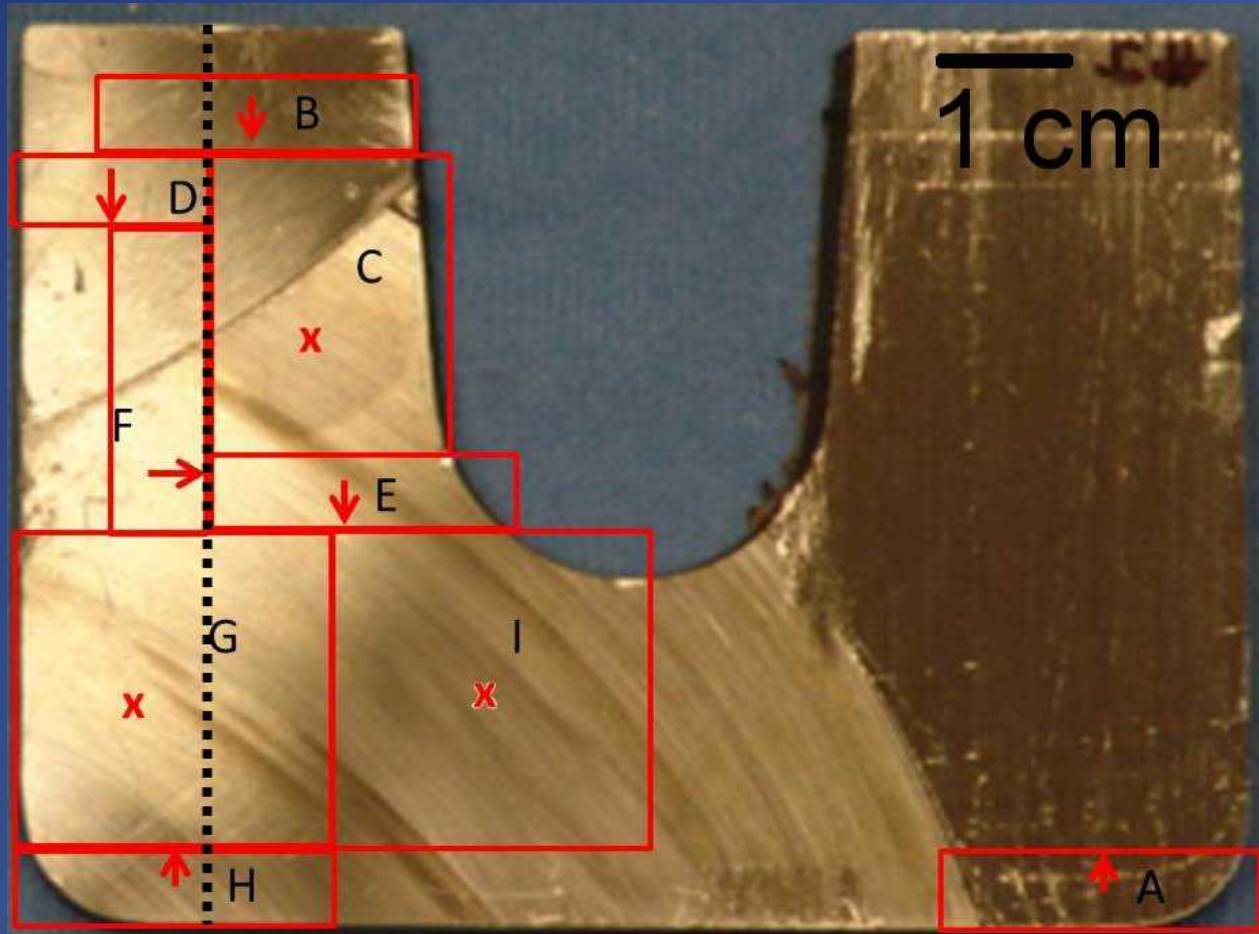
Map of sectioning for both the as-forged slice and the welded slice.
